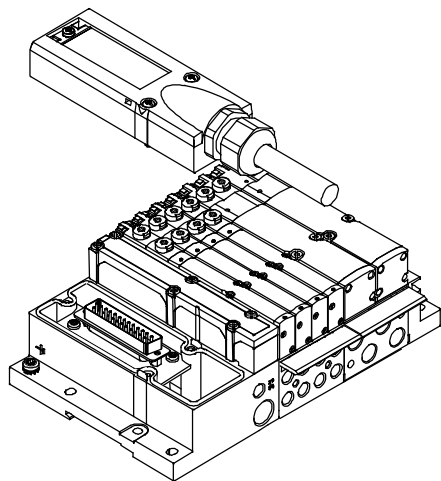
Valve terminal MPA-S with multi-pin connection
